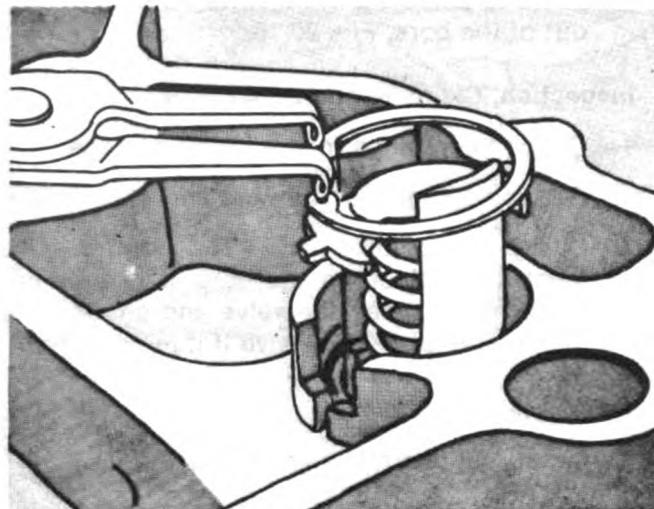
Remove The Snap Ring From The Slave Piston.
